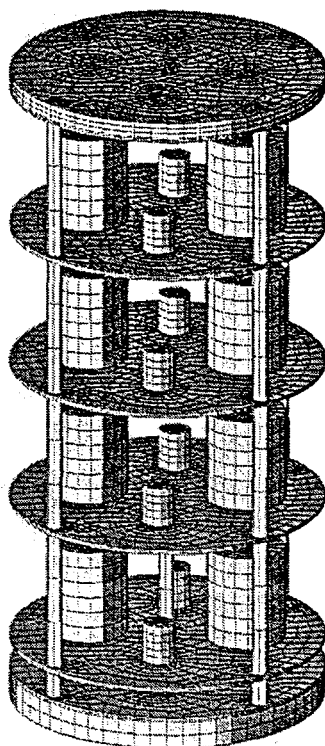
Finite element mesh of furnace work rack and loaded test pieces.
